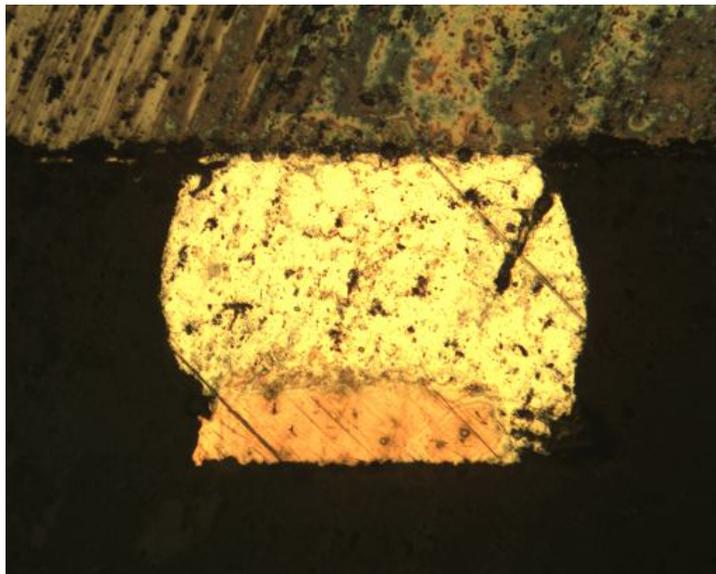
Epoxy 1 on FR4 Substrate Solder Ball Crack and Solder Extrusion into Void, 1200 Cycles
